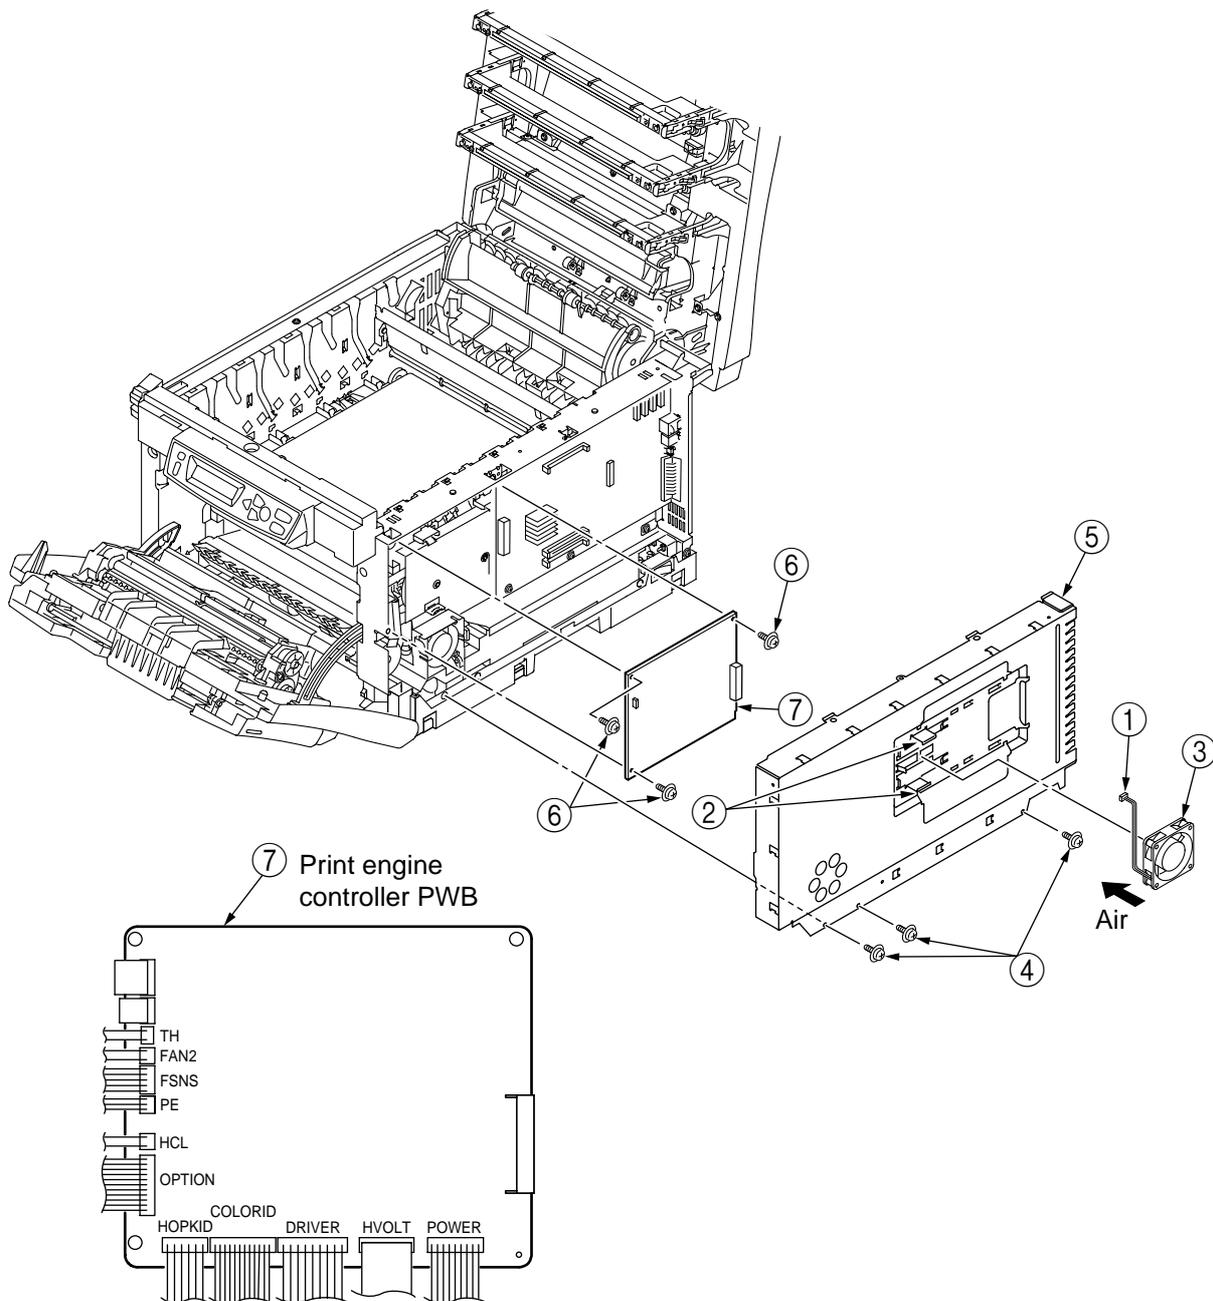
Print Engine Controller PWB (C5300)
